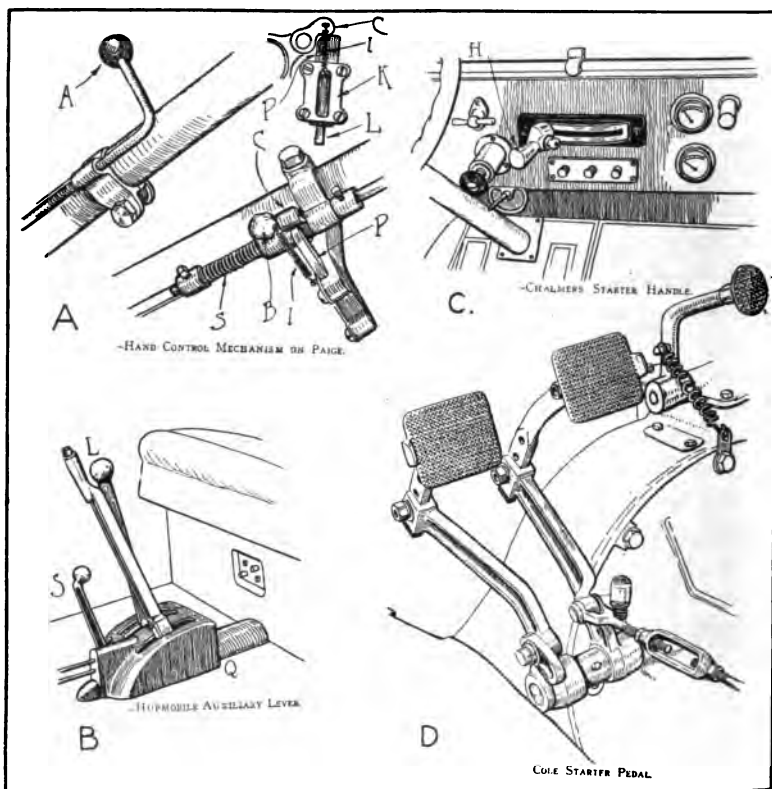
Methods of Actuating Motor Starting Mechanism.
